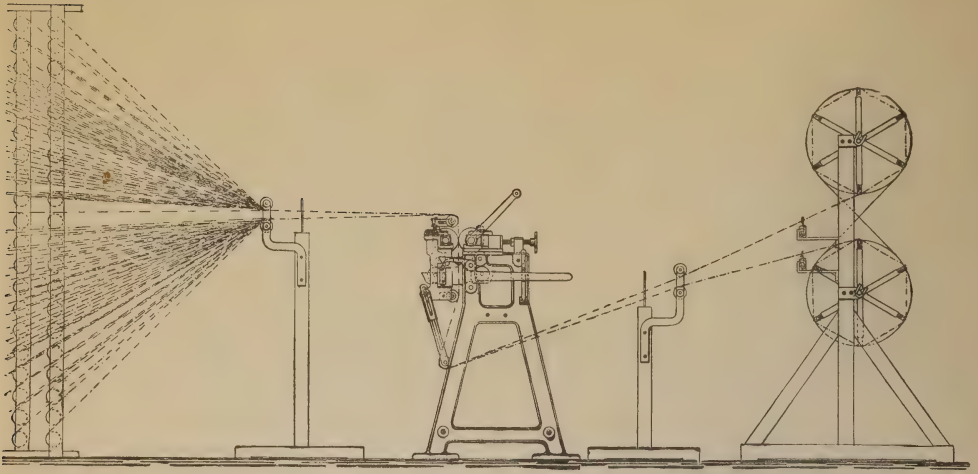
Hank-Printing Machine used as a Thread-Printing Machine.
